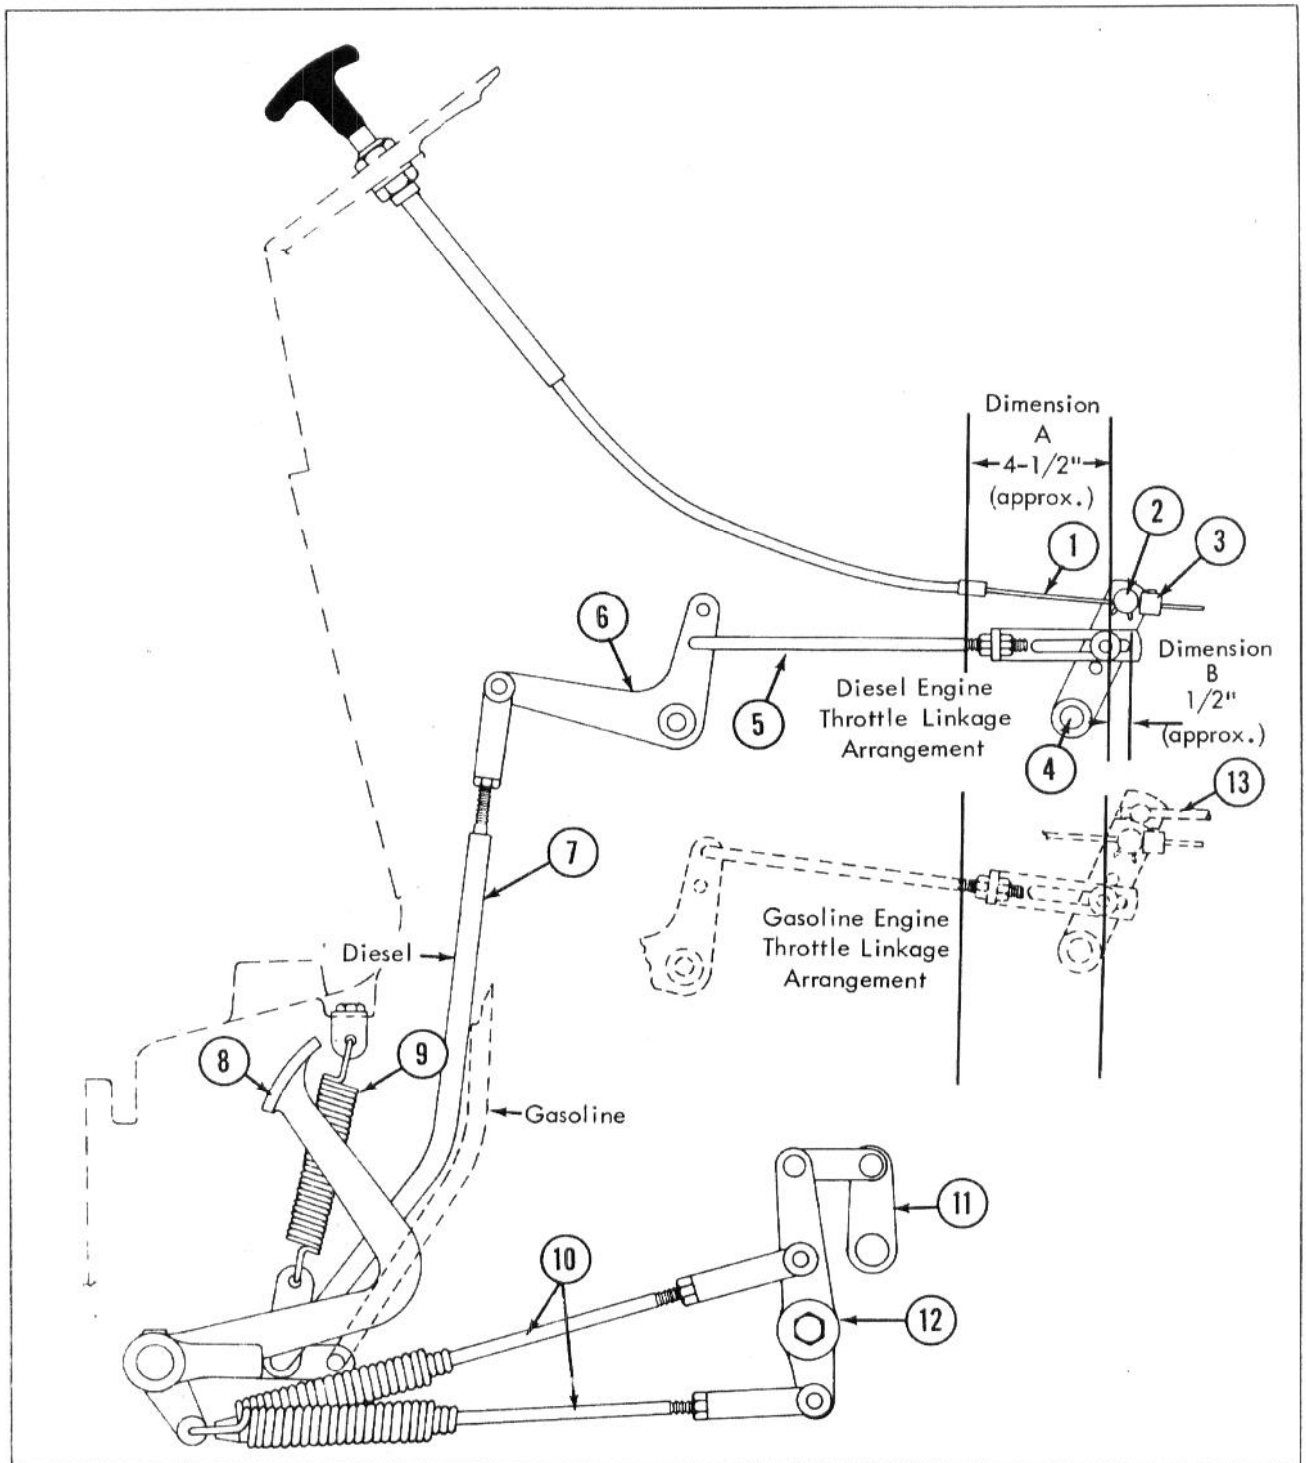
THROTTLE LINKAGE ADJUSTMENT — I. R. TRANS.
